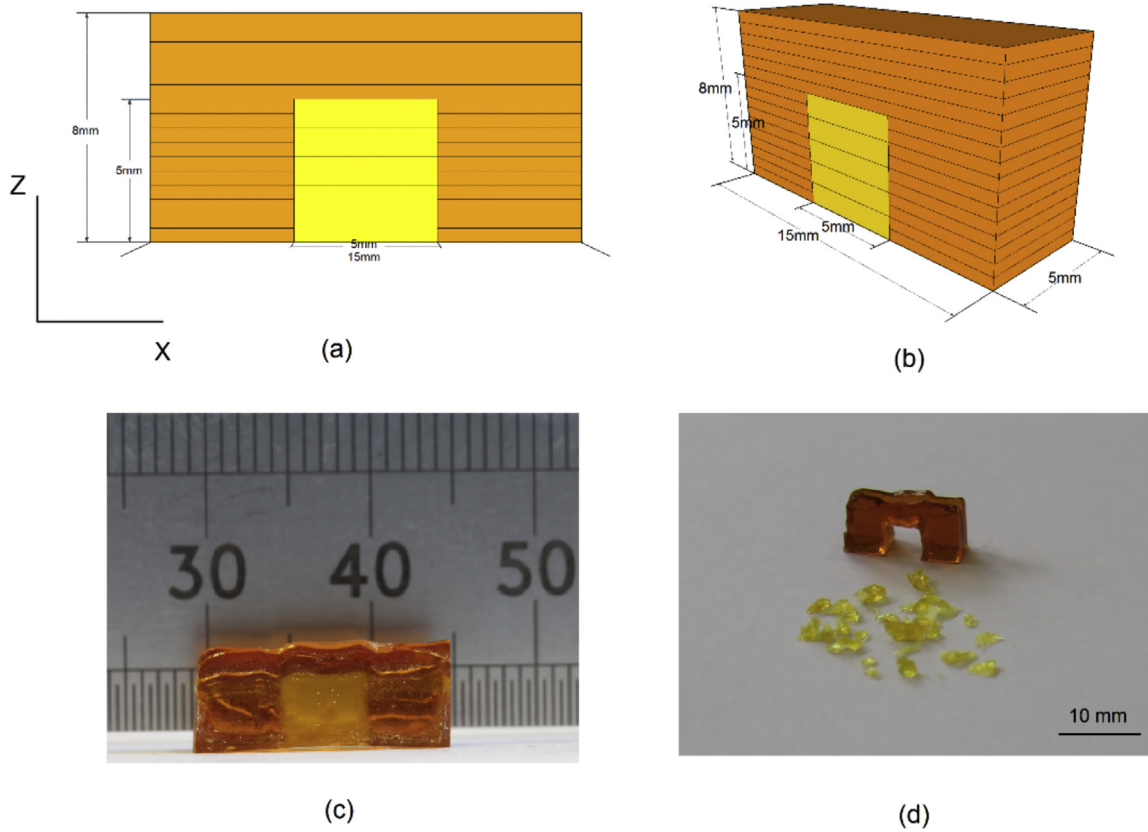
(a) and (b): schematic of gate like structure; (c) front view of the printed demonstrator before the removal of support; (d) after the support structure was removed.
